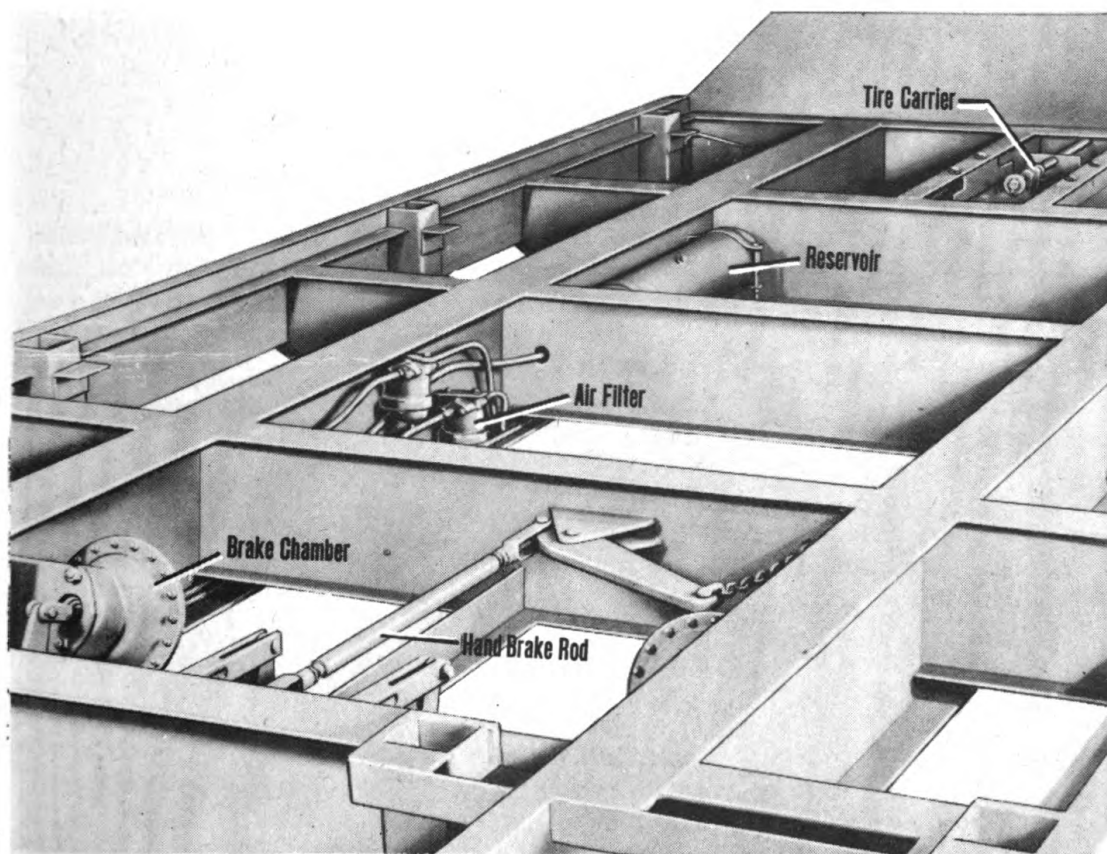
Looking Down on Full Bed of Trailer, with Platform Removed.
